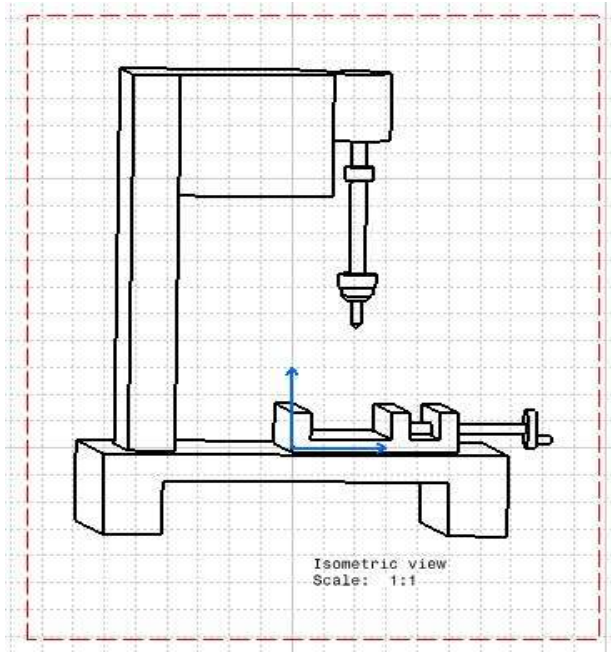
2D View of Friction Welding machine (CATIA)
